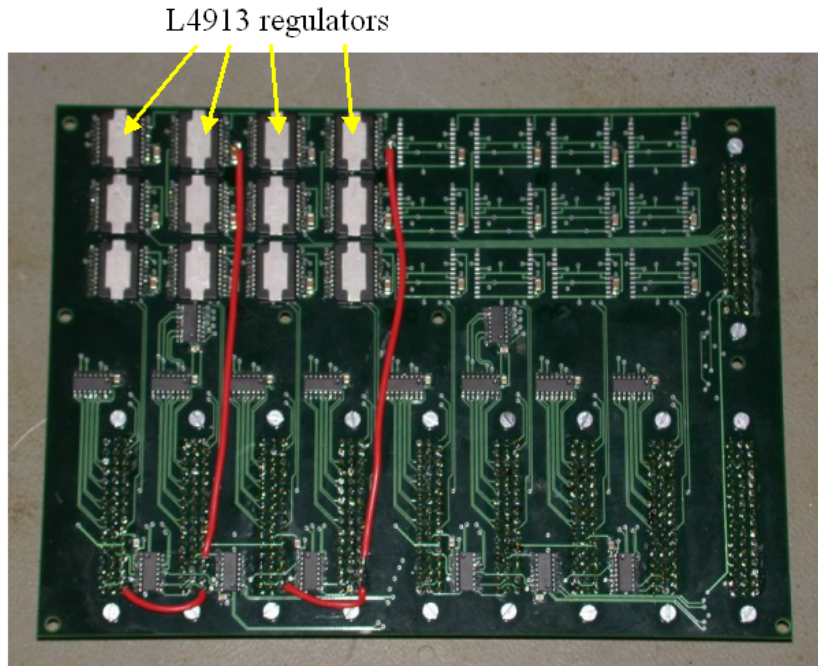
View of the backplane regulators (backplane only partially equipped).
